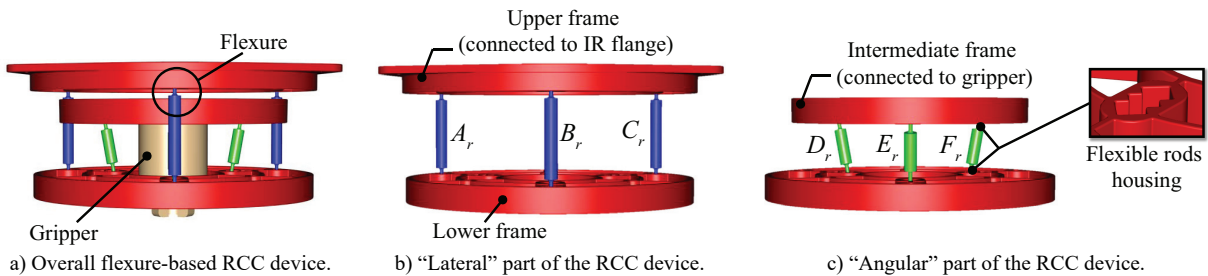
CAD model of the flexure-based RCC device: (a) overall device (including gripper); (b) “Lateral” RCC part; (c) “Angular” RCC part with side view of the rods’ housings.
